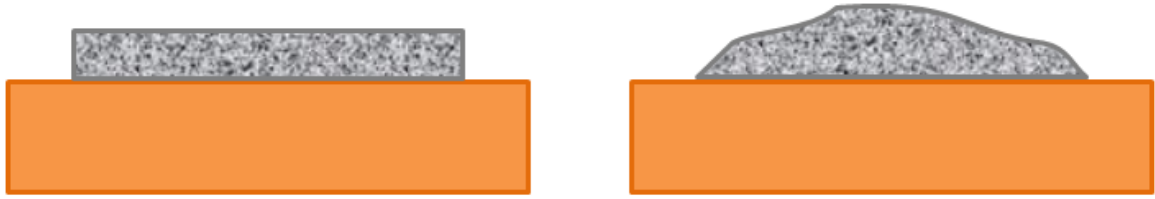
Intended solder pad profile (left) and an example of the hypothesized solder pad profile (right) produced by the full scale assembly's solder stencil
